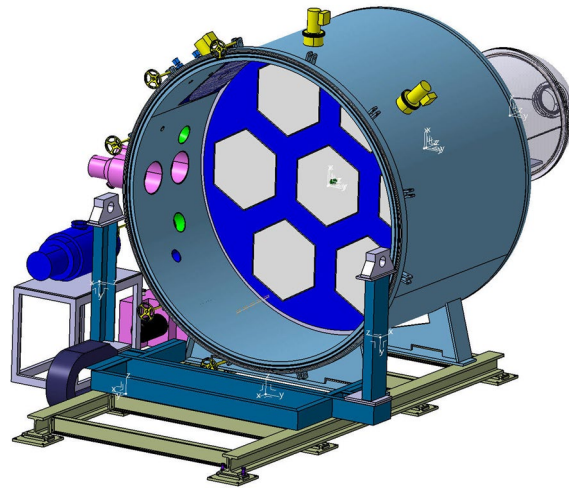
Conceptual drawing of vacuum vessel: GRP cylinder, beam dump and honey comb
